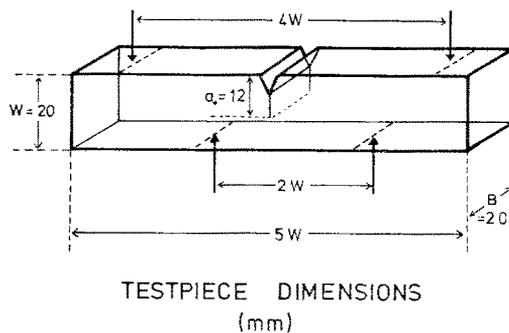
Geometry of a single edge notched bend test-piece. (Specimens were fatigue pre-cracked to a crack length of 12 mm, i.e. $a_0/W = 0.60$.)
